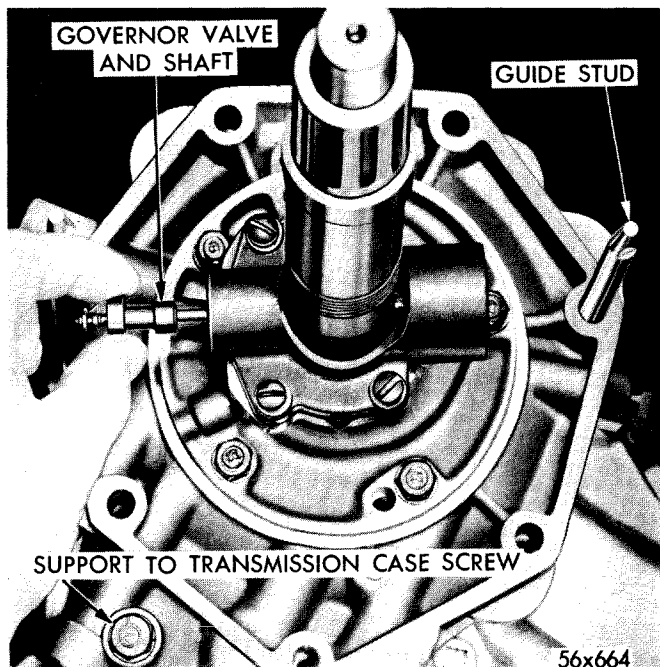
Removal and Installation of Governor Valve Shaft and Valve
